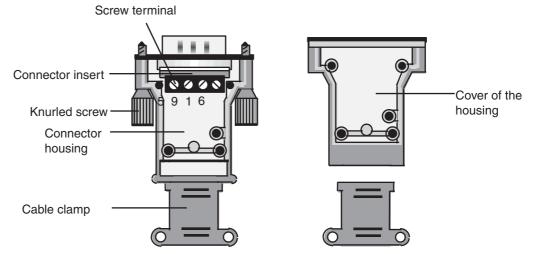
Industrial Twisted Pair D-sub male connector (9-pin) for user assembly
